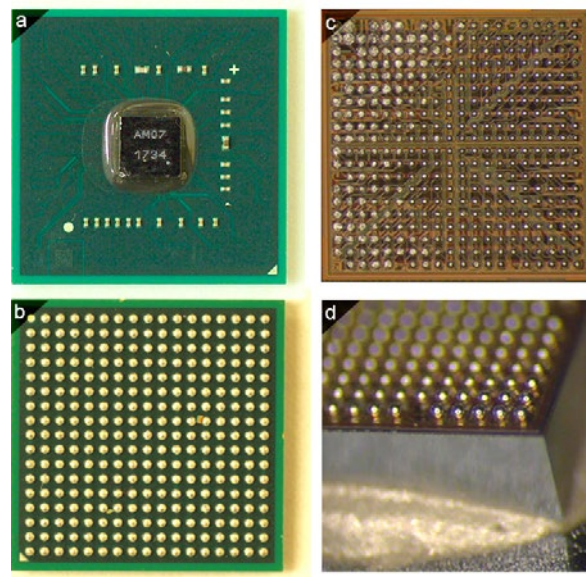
Photograph of AM07: a) top face: die mounted on the ad-hoc BGA package ; b) bottom face: balls of the ad-hoc BGA package; c) top face: die bumps and RDL layer; d) bumps details.
